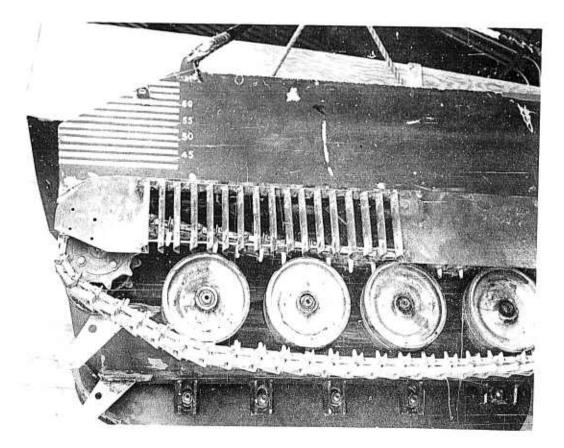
REVERSING VANES IN SHROUD 3.9.26
